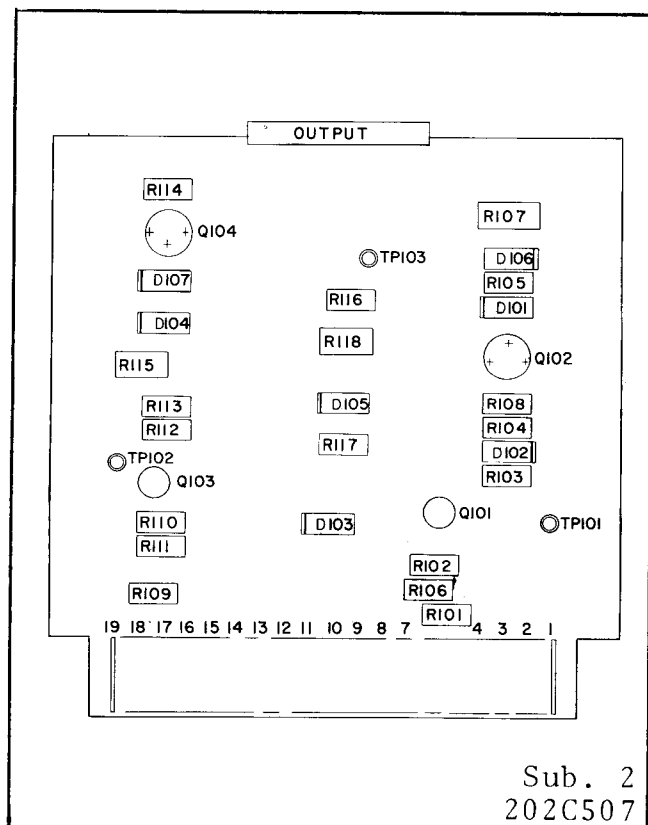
Component locations on the amplifier and limiter printed circuit board.
